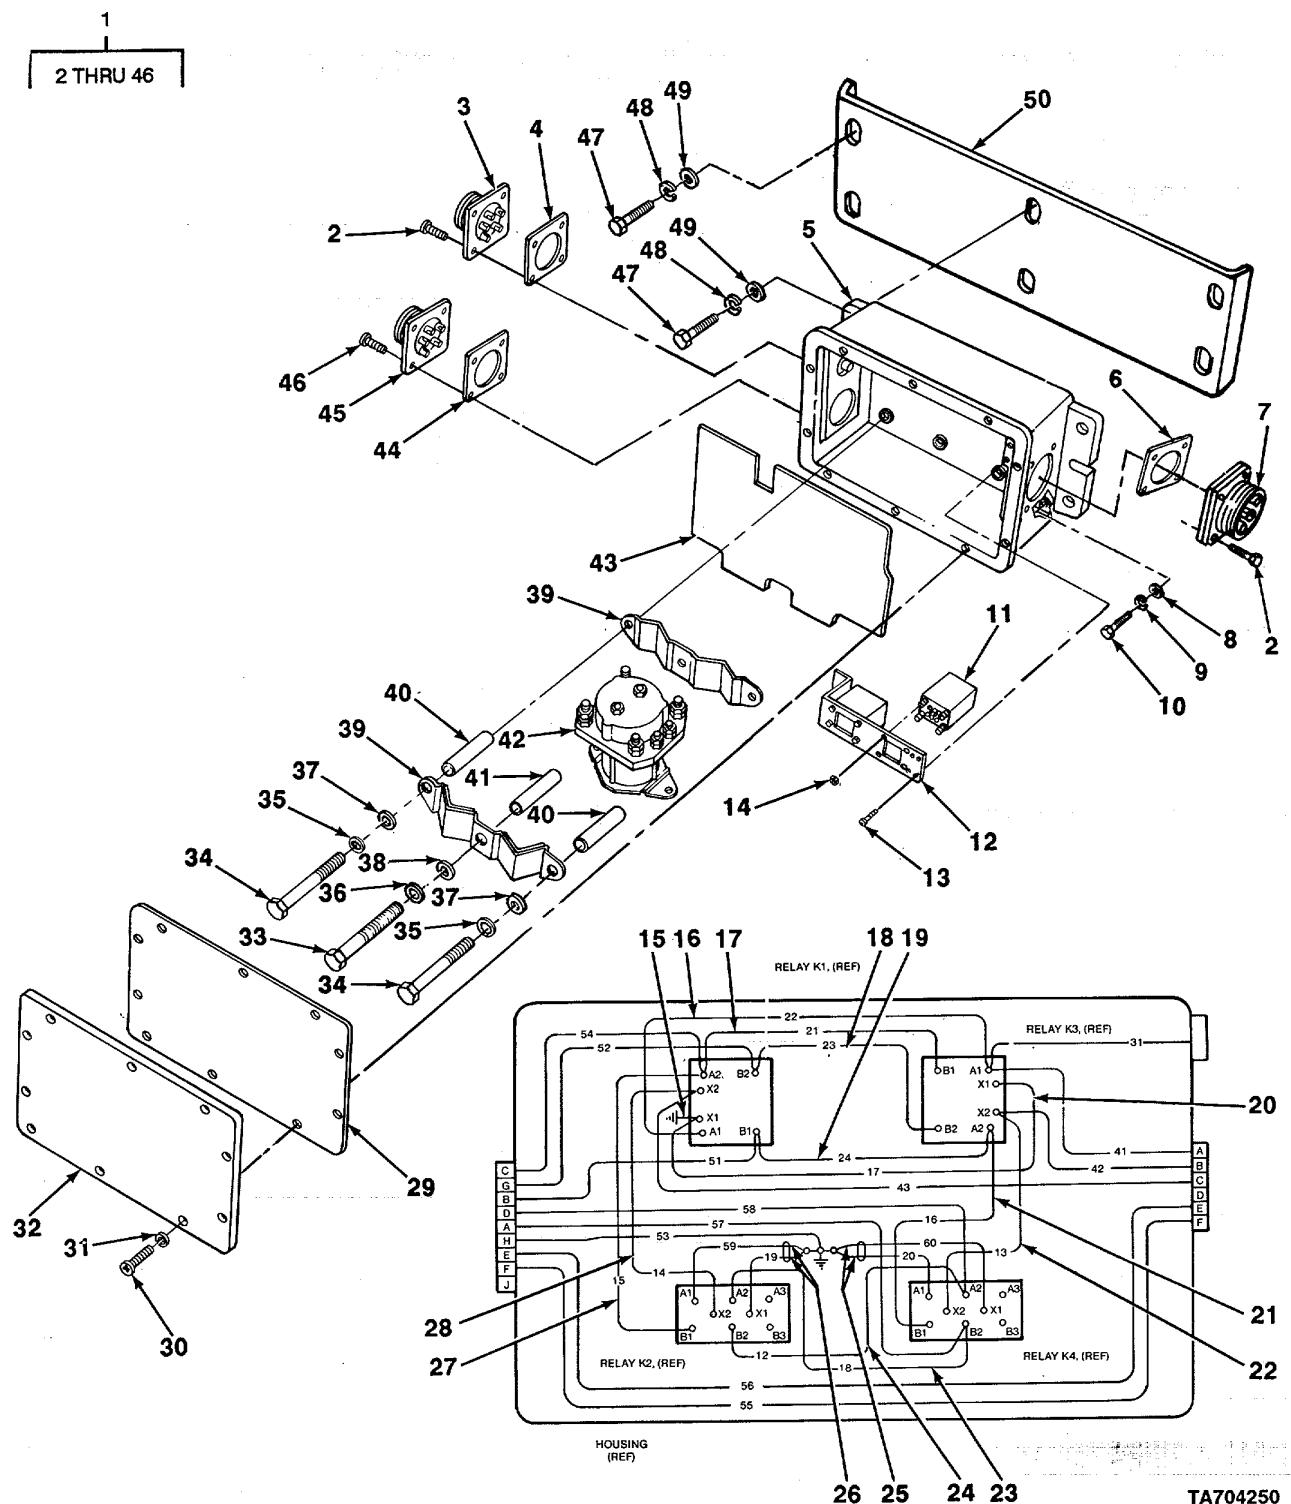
OUTRIGGER RELAY BOX ASSEMBLY.
